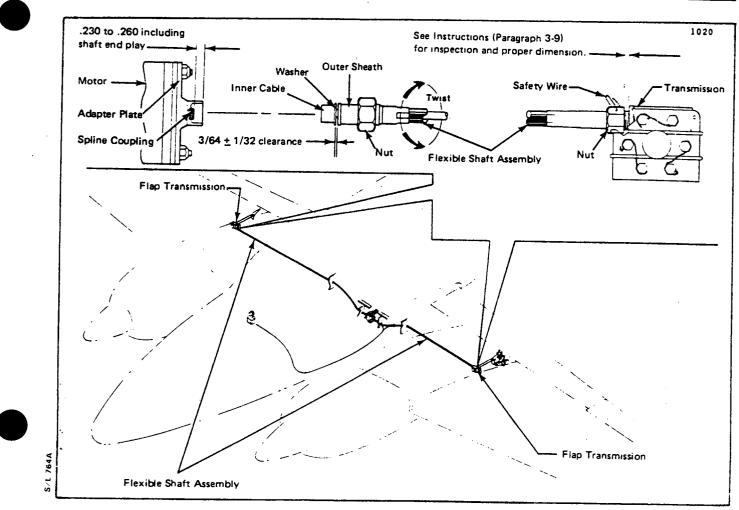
Wing Flap Actuator Cable - 100 Hour Inspection
